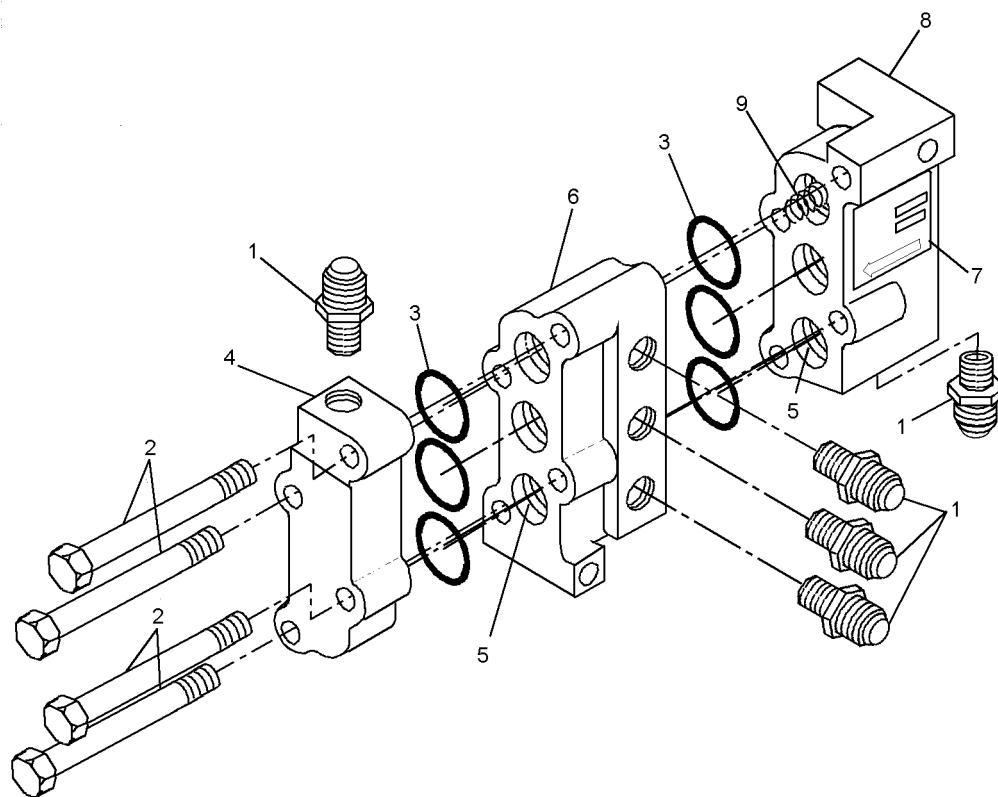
High Pressure Oxygen Manifold and Check Valve Assembly
